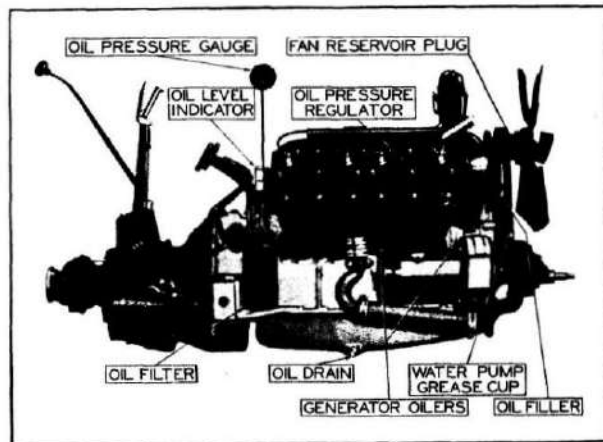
Showing the location of the oil filler, oil level indicator, oil pan drain plug and other lubrication features.
